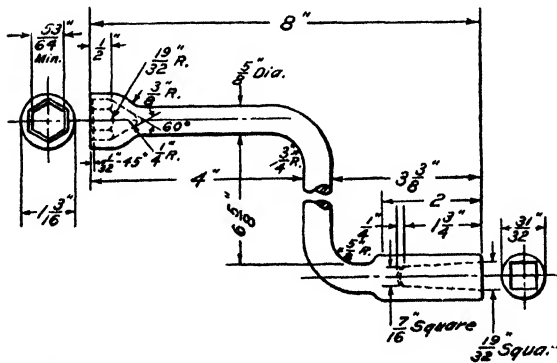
Cranked socket wrenches are often produced by hot heading, although the bending could be done also in a bulldozer.
